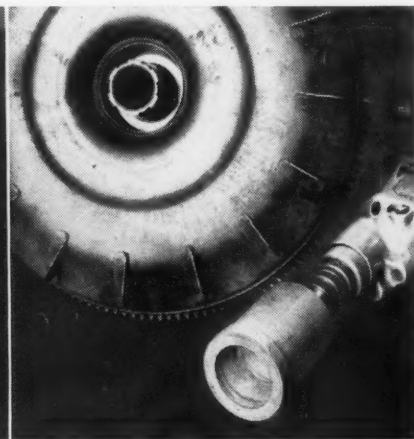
The pressure plate nut is removed with a special wrench and holding tool. The plate is taken off with the puller.
